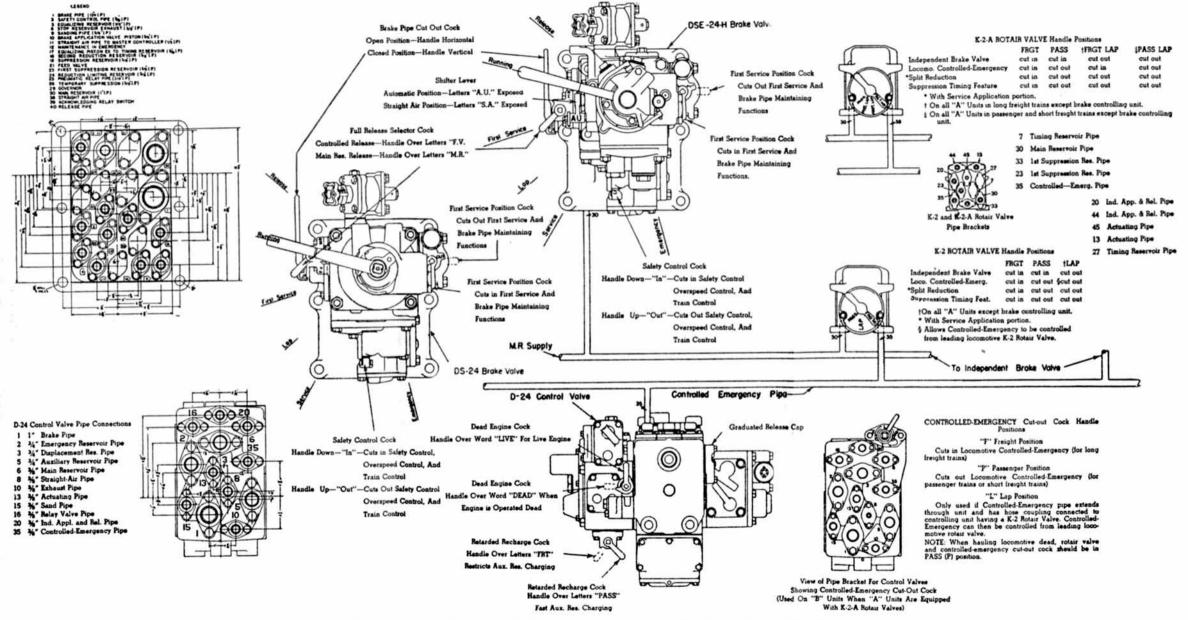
Cock Handle Positions for Operation of 24-RL Equipment in Various Types of Service
